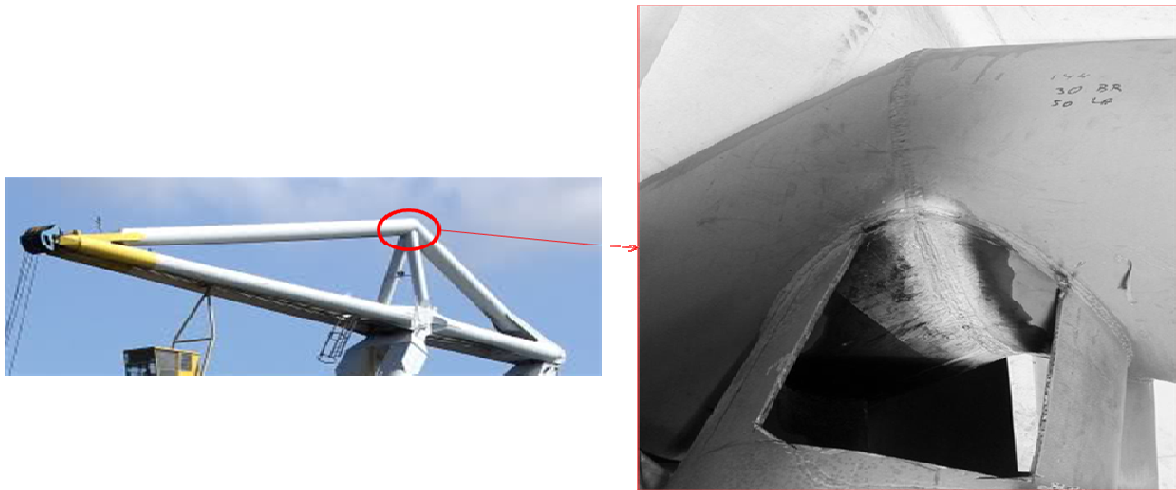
Geometric construction of tubular joint (Maja Stuwadoors BV, 2016)
